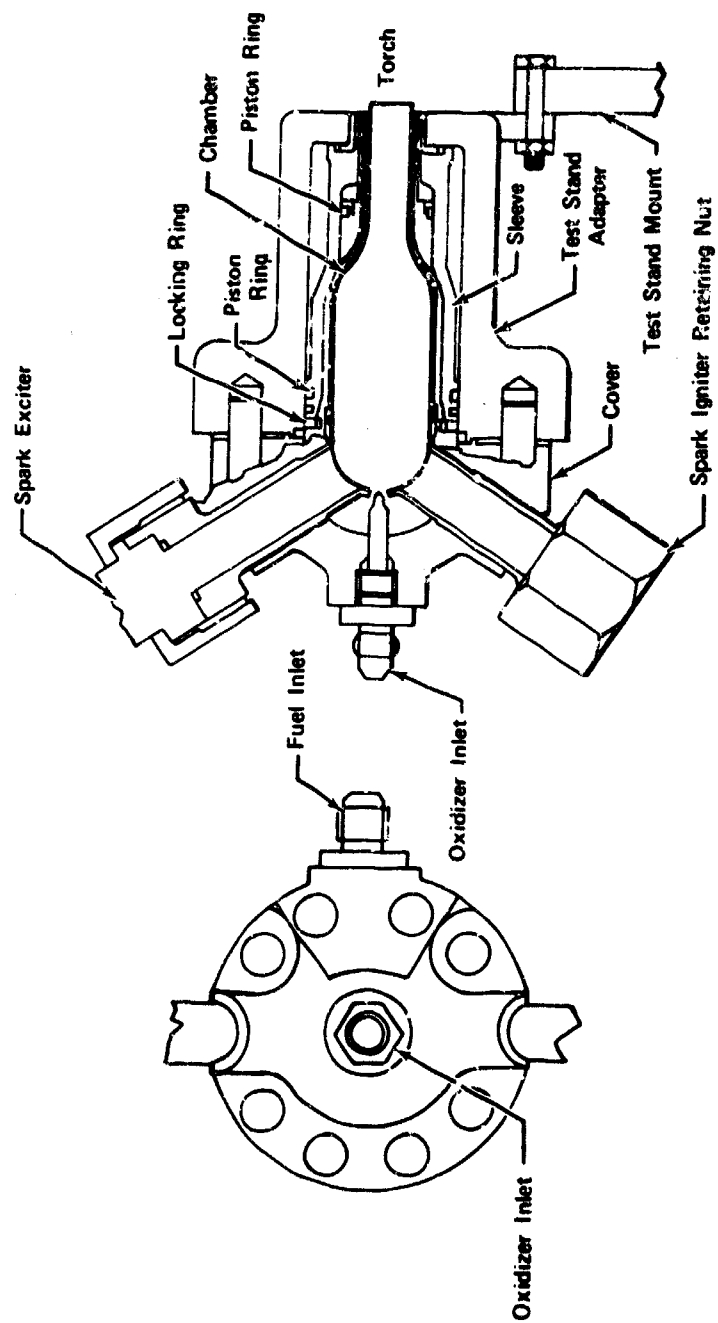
Preburner Torch Igniter Assemblies Mounted in B-7 Test Stand
